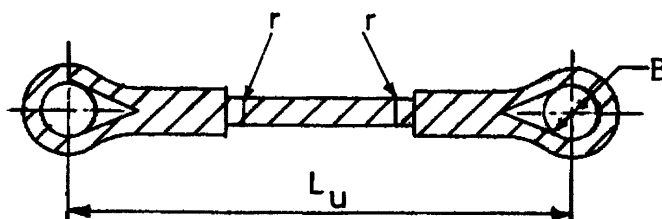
EYE-SPLICED TEST PIECE MOUNTED ON BOLLARD GRIPS.
